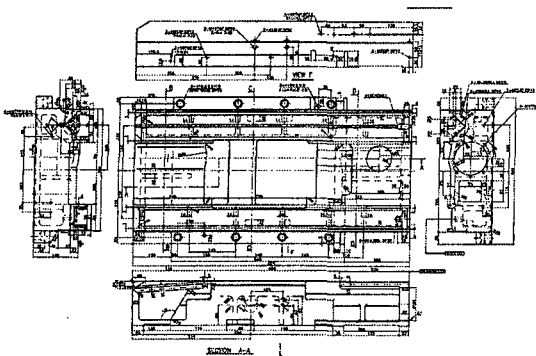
Drawing of head unit base for the cam profile CNC grinding machine
